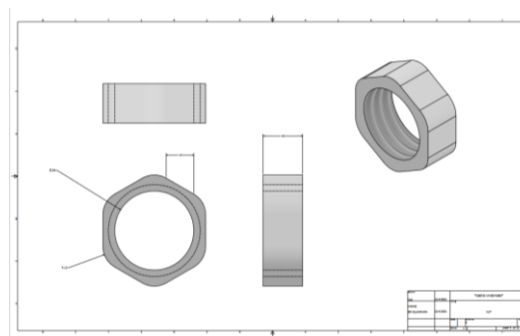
Nut - The nut serves to further tighten the screw bond on the parts that need to be screwed.
